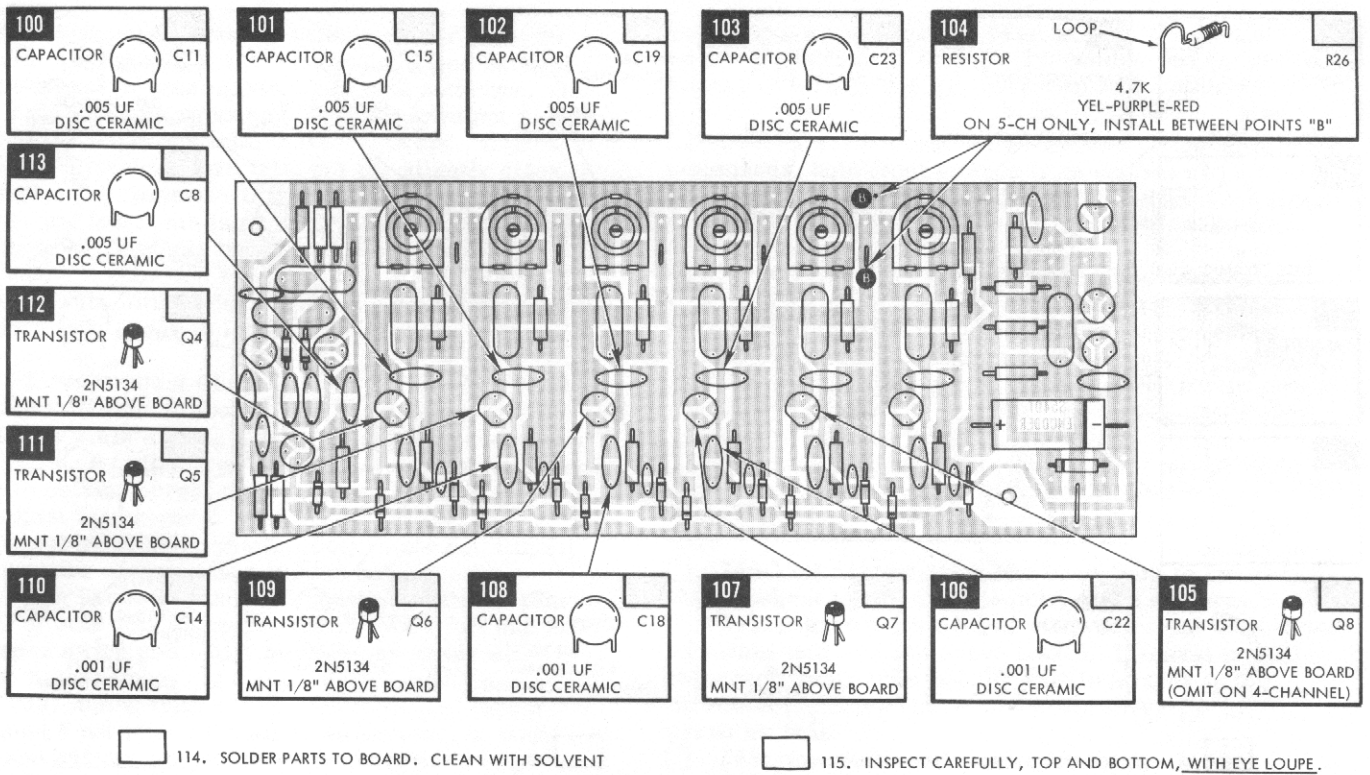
Logic Board Assembly (Sheet 6 of 6)
